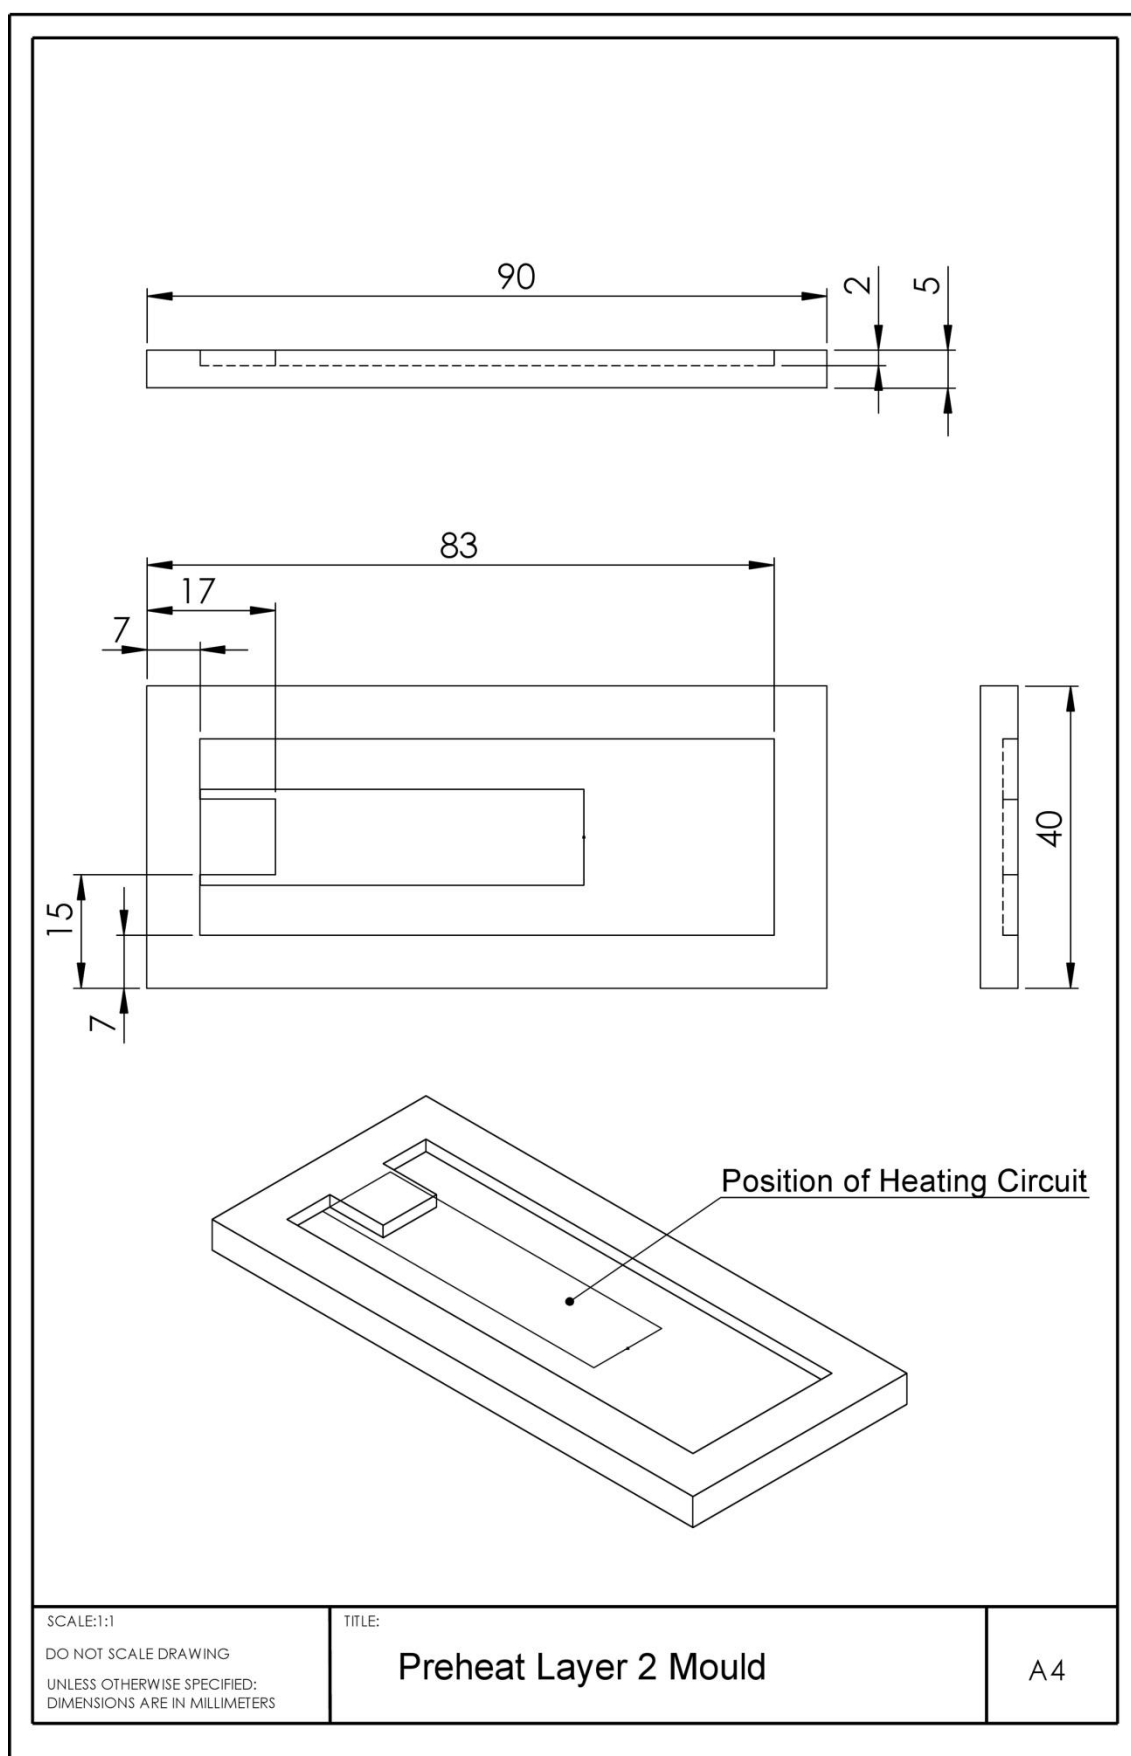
Technical drawing of mould for layer 2 of the preheat and bubble trap unit.
